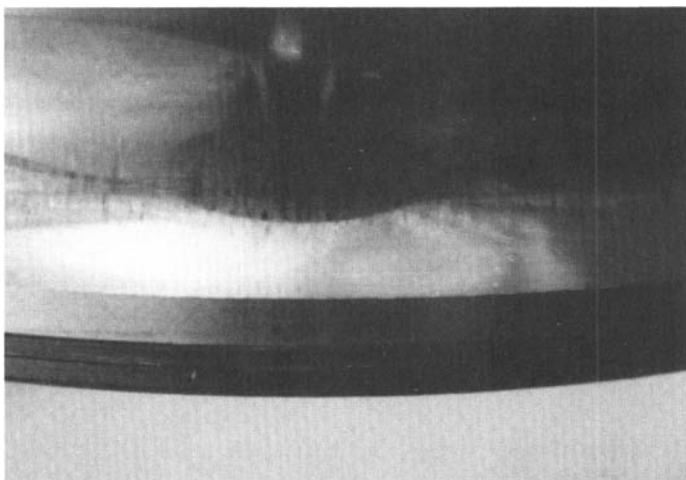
Fatigue crack on hydraulic pump flange caused by hammering impact during installation. (Courtesy of Kayaba Industry Co., Tokyo, Japan.)
